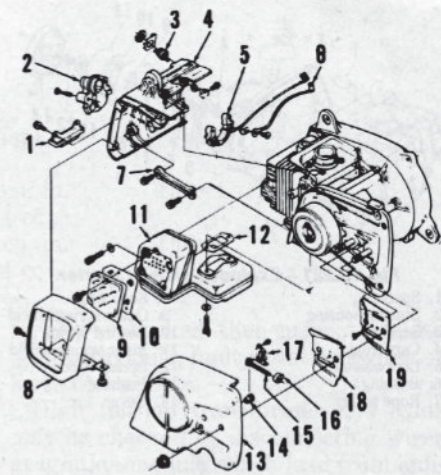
Exploded view of exhaust and chain tensioning assemblies.
